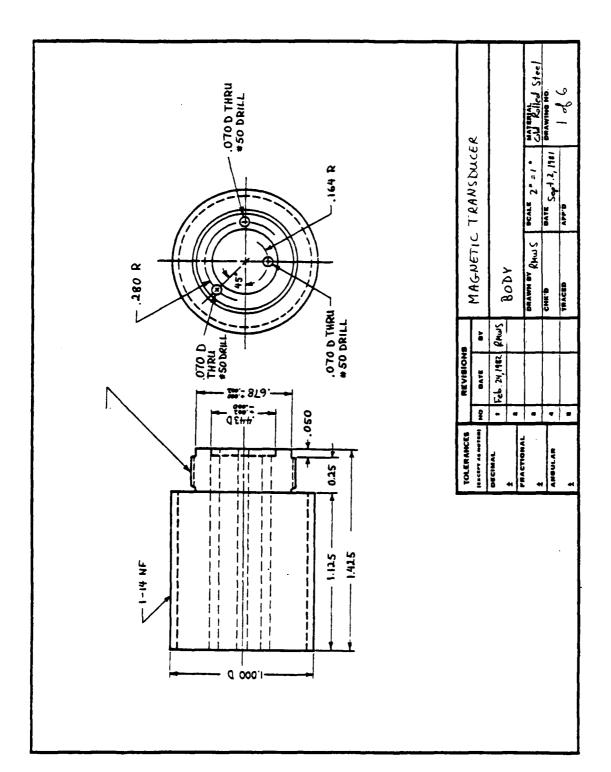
through 3.7 show the design drawings of the parts of the transducer assembly.
